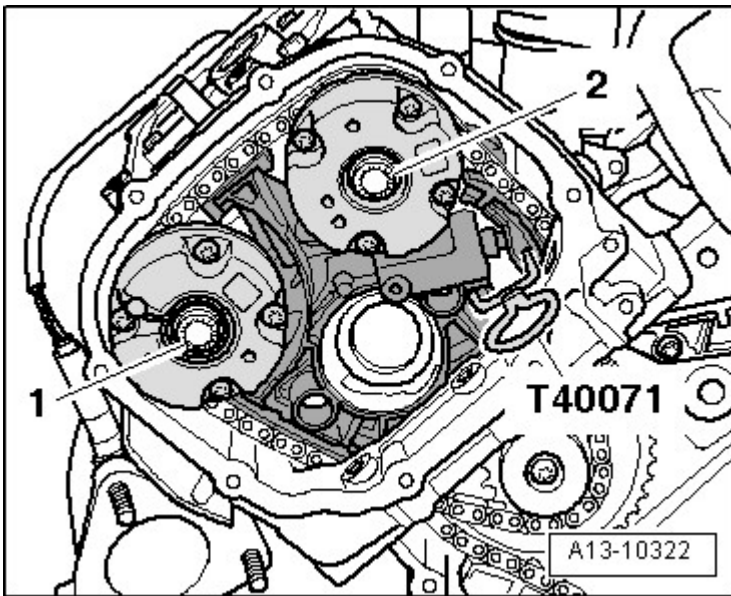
Identifying Bolts On Left Cylinder Head And Removing Both Camshaft Adjusters
